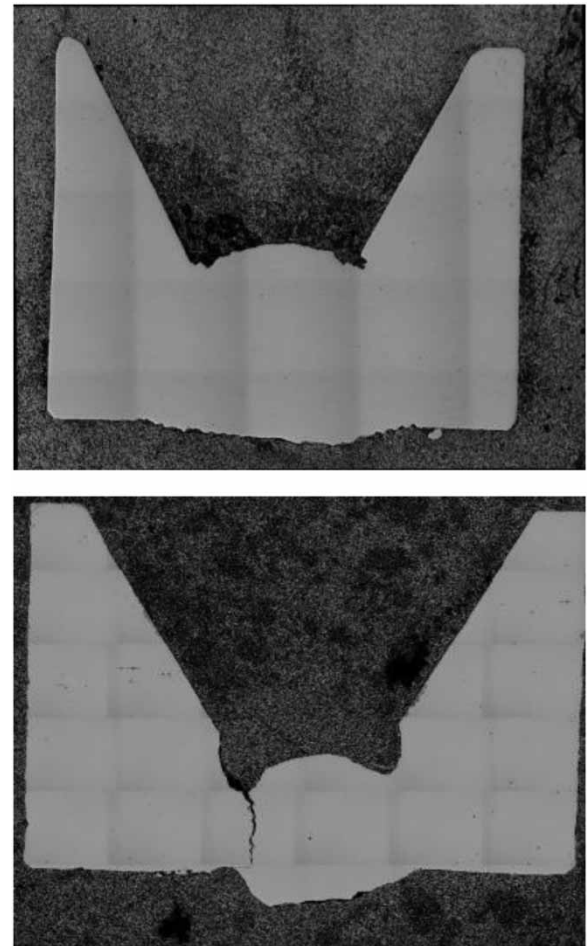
Acceptable and defective welds highlighting the defective welding 'window'/burn through on the WIC test at low heat input and high travel speed.
